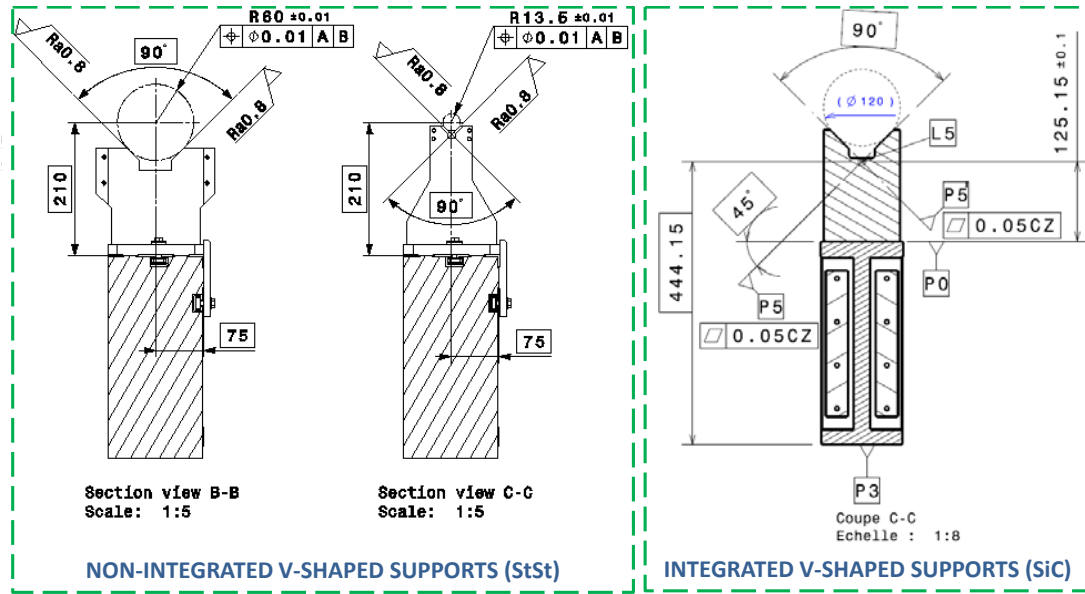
Design of the sub-assembly of girders and V-shaped support with their micrometric fabrication tolerances (extracted from the production drawings)
